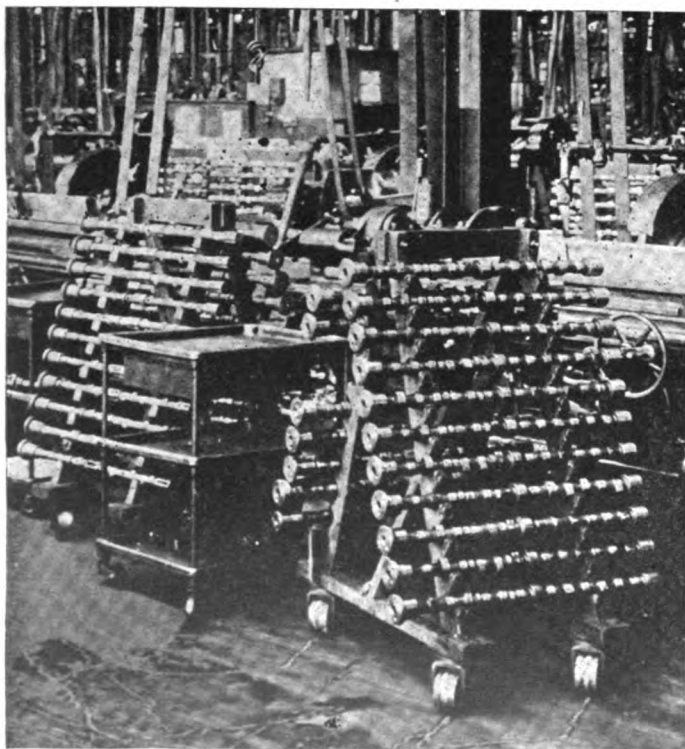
Camshaft carrying racks in the finished grinding department of the camshaft floor
